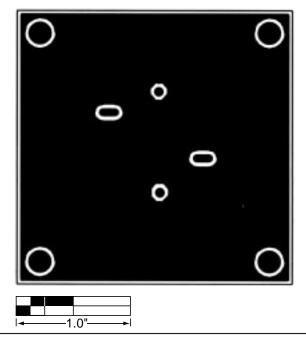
MAX4104 EV Kit PC Board Layout—Solder Side
